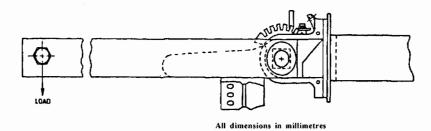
LOAD TEST ARRANGEMENT FOR MECHANICAL ELBOW JOINT
